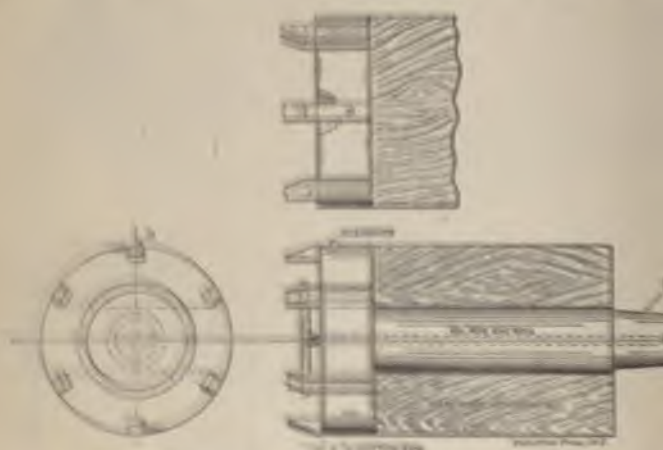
Boring Tool for Bores of from Three to Six Inches in Diameter.
